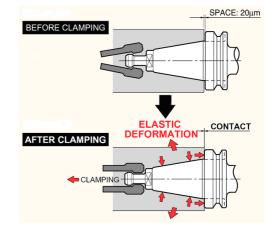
Elastic deformation of the spindle after clamping by ensuring tool holder dual contact
